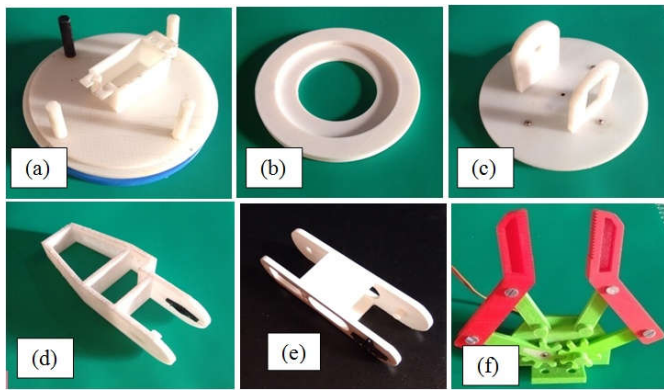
AM fabricated parts (a) base part, (b) base plate, (c) shoulder part, (d) elbow arm, (e) shoulder arm, (f) gripper assembly.
